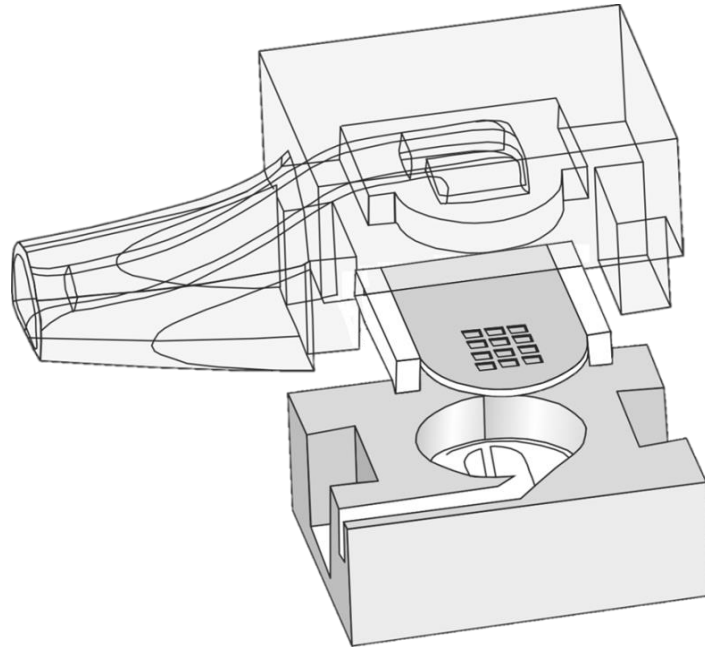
Design of the Modular Inhaler with upper part, grid and bottom part
